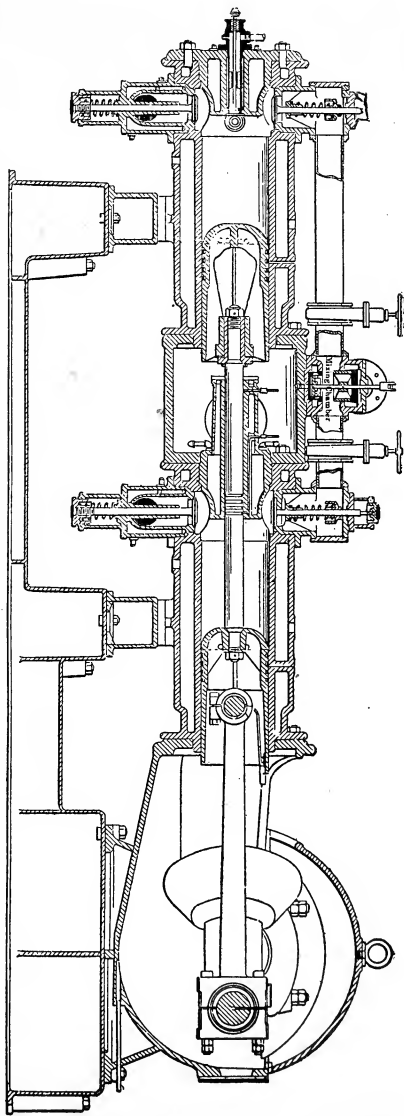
LONGITUDINAL SECTION OF DU BOIS TANDEM GAS ENGINE
